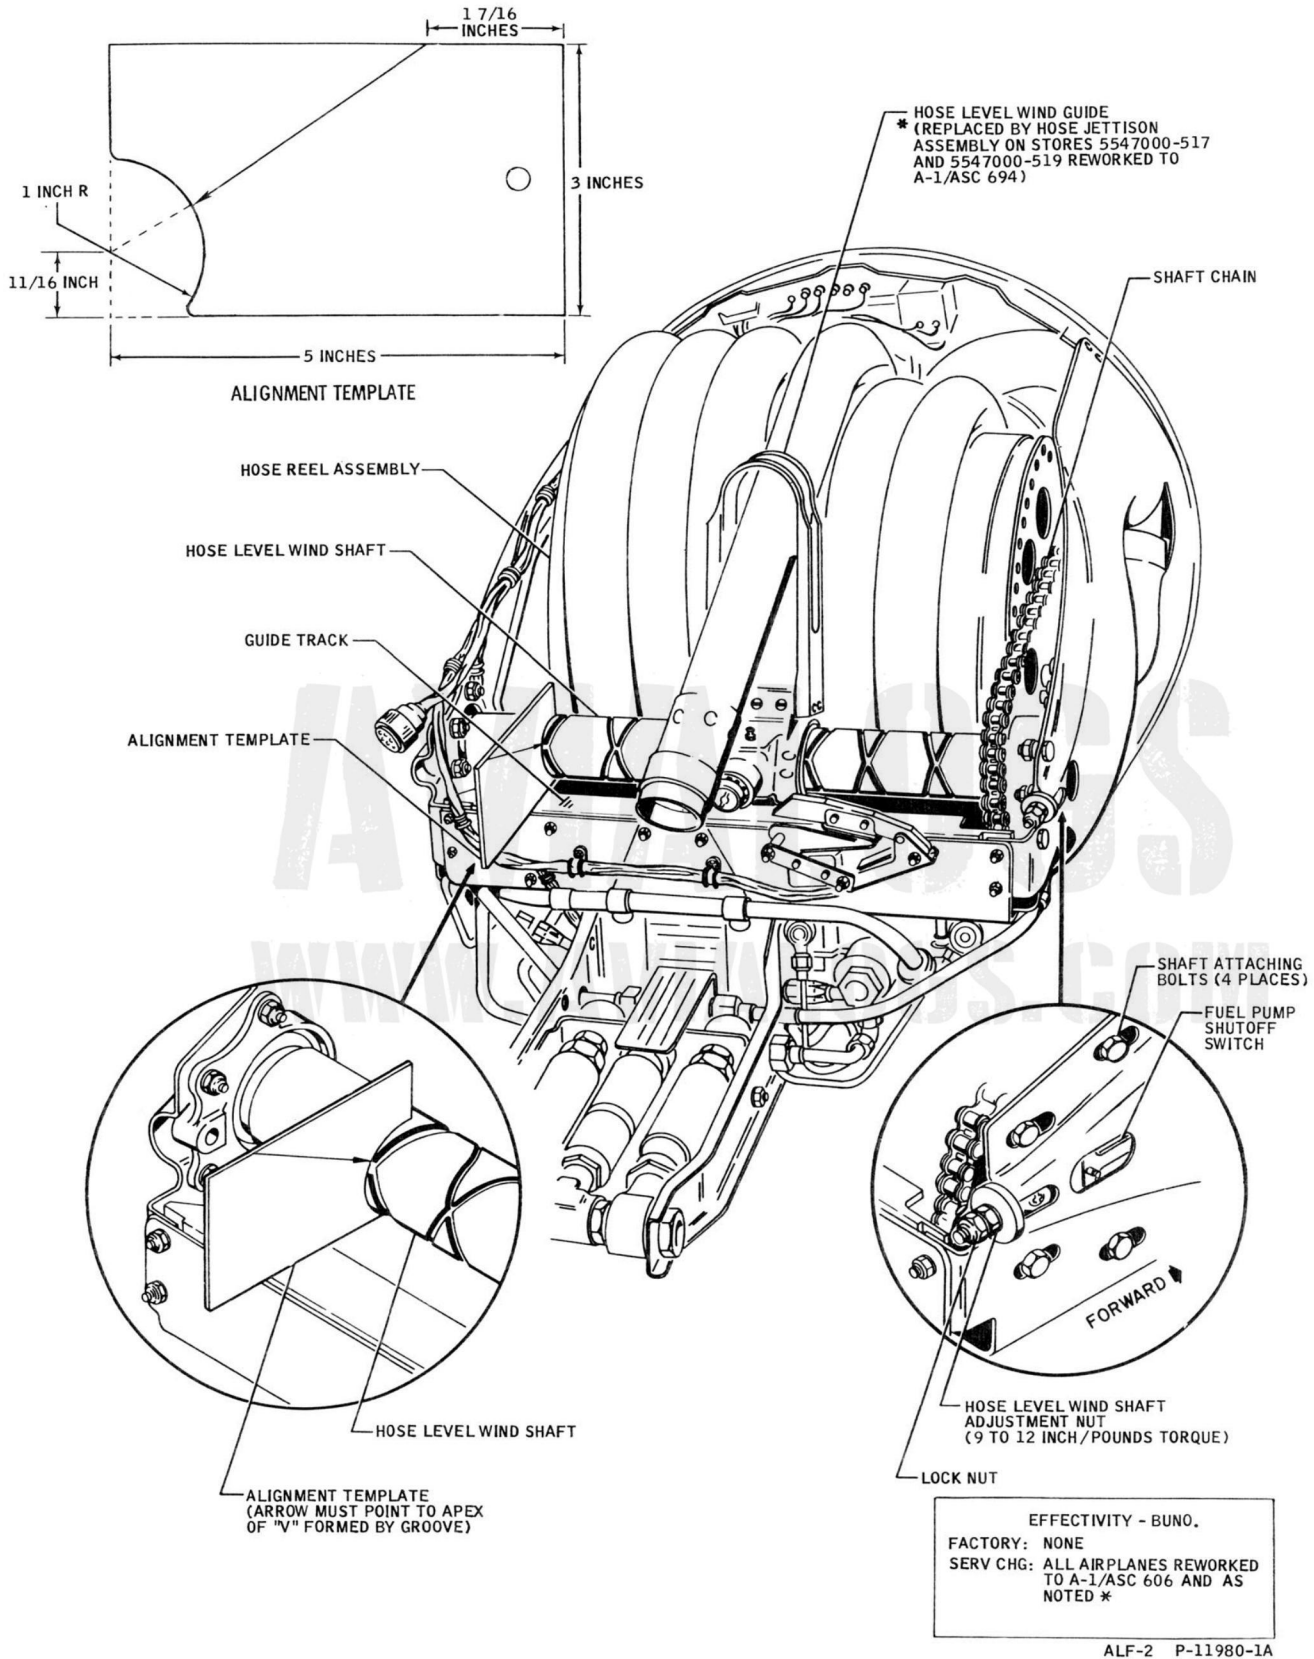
In-Flight Fueling Store - Adjustment (Sheet 1)
